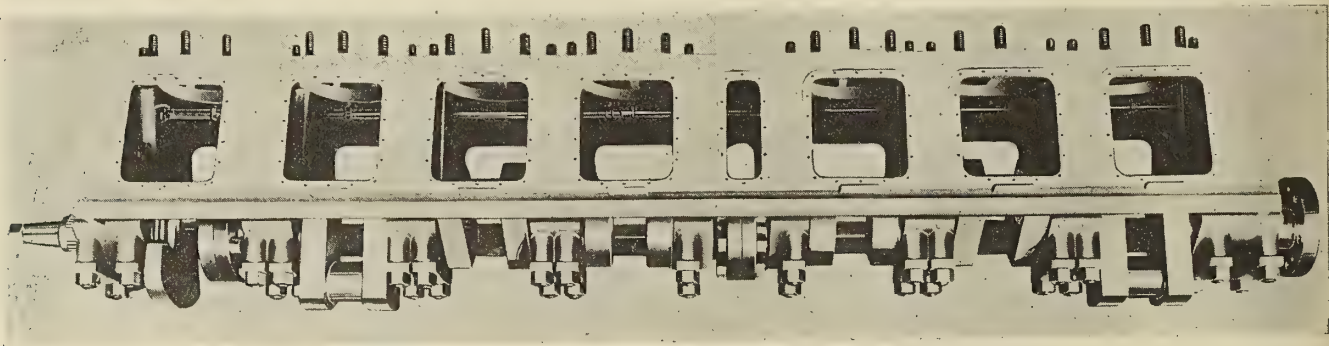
Upper Crank Case, Showing Method of Bolting Crank Shaft to Top of Case Instead of to the Bottom
